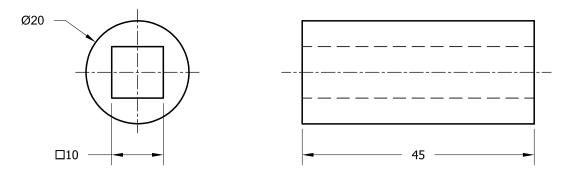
Orthographic views and dimensions of Jack Rotor
